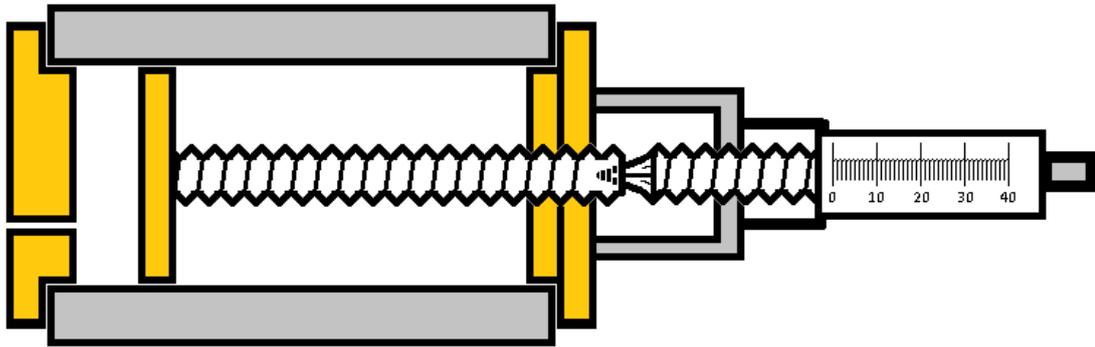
Complete assembly of the newly proposed test fixture with calliper.
